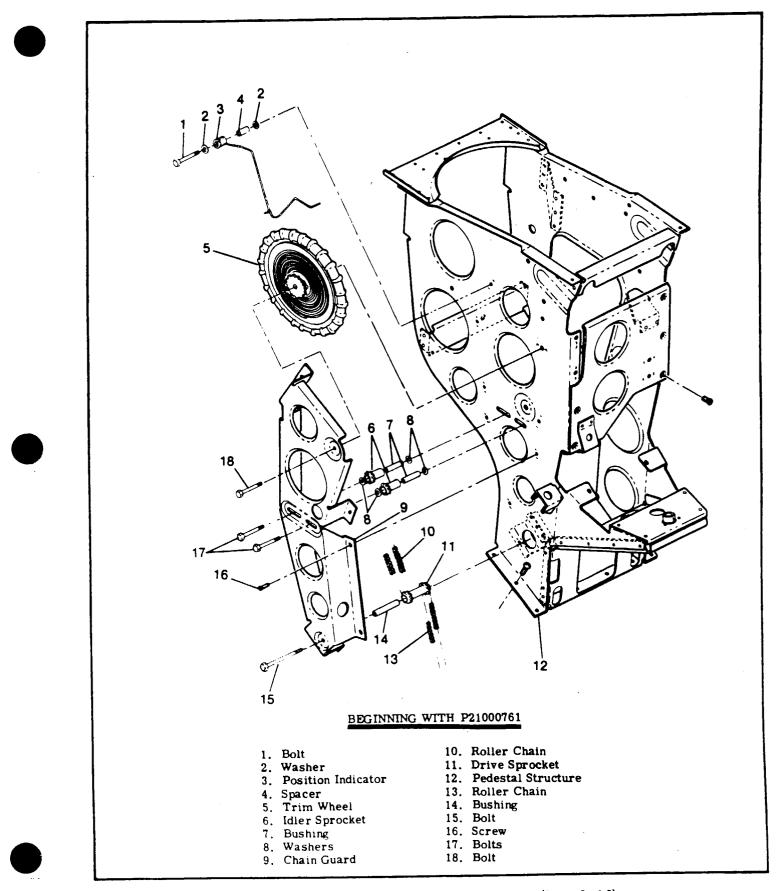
Elevator Trim Wheel Installation (Sheet 2 of 2)
